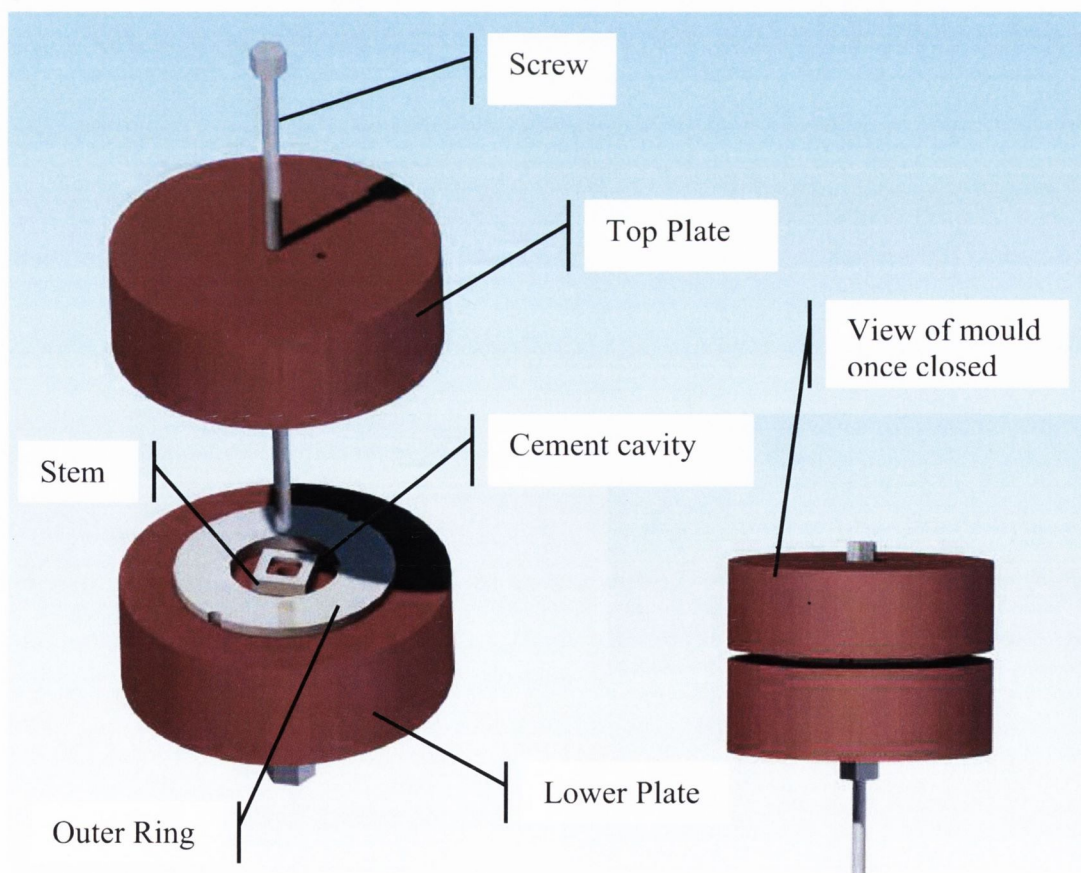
Schematic of specimen and mould developed for torsional fatigue testing.
